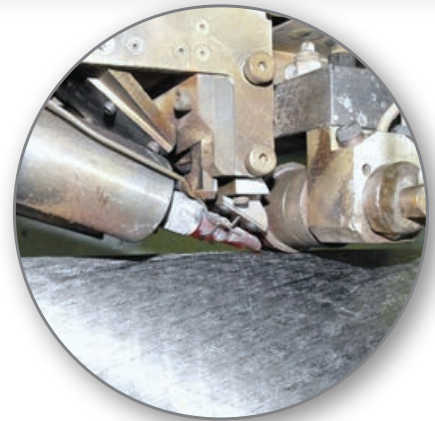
Driveshaft Fabrication Using Automated Dynamics In-Situ AFP Process.
